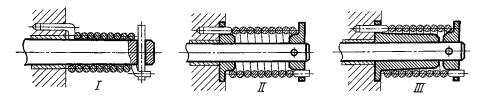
Centring torsion springs I—incorrectly; III—correctly; III—with tapered sleeve
